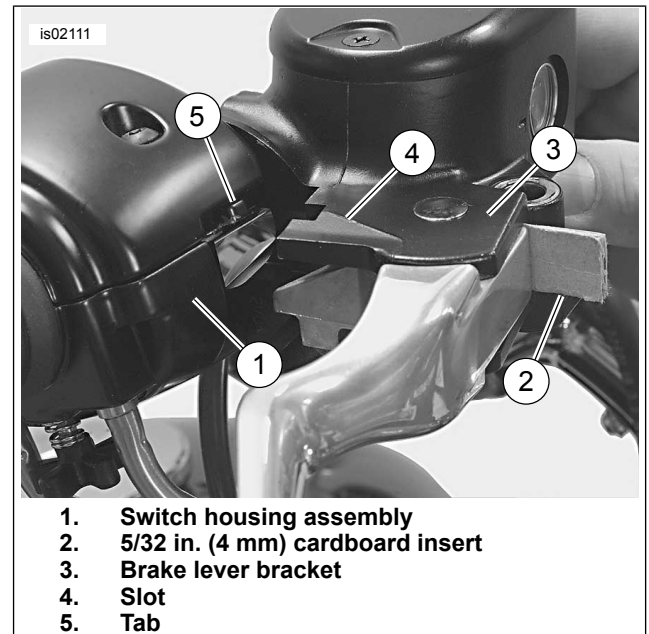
Fitting Brake Lever/Master Cylinder to Right Handlebar Switch Housing
